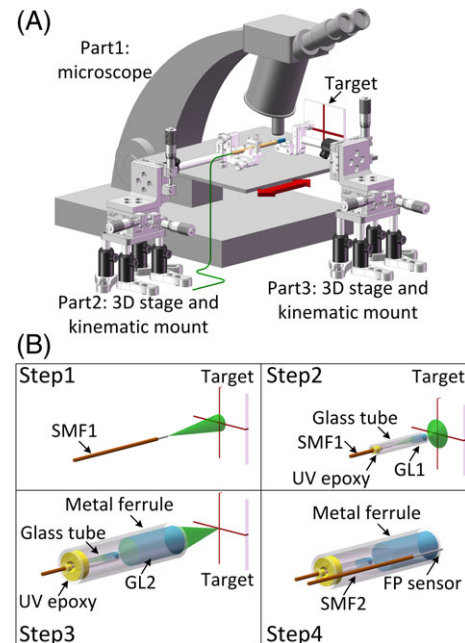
Assembly of the DGL-PAM probe. (A) Modified microscope system. (B) Illustration of the four steps for assembling DGL-PAM probe
